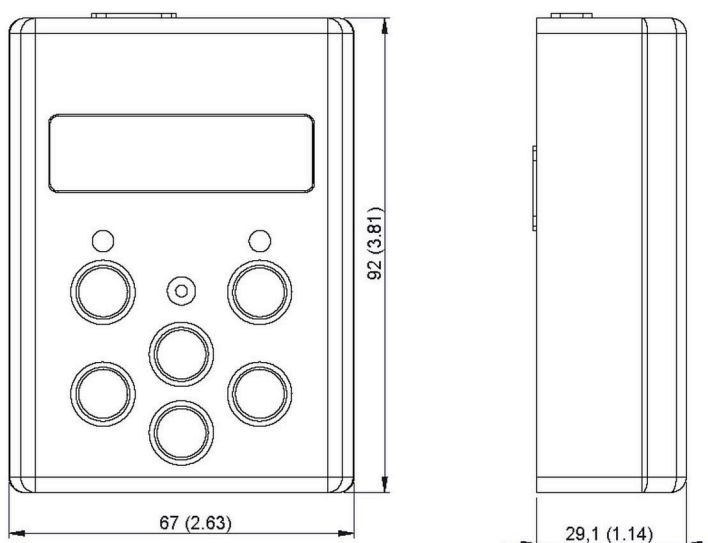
Dimensions of the operating terminal 0362150 in mm (inch)
